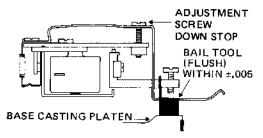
HEAD LOAD ACTUATOR DOWN STOP ADJUSTMENT
